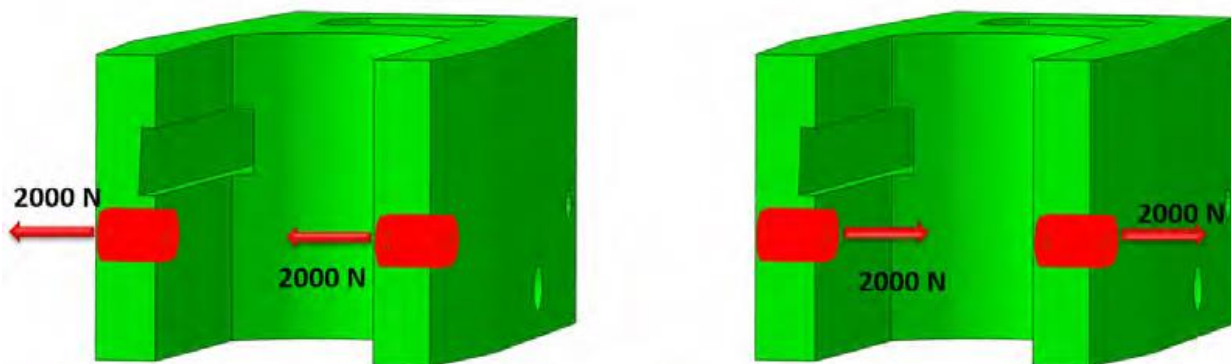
Load Case 3: Service loads acting on swing arm – lateral bending load
